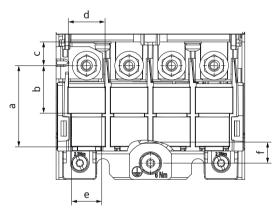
Dimensions of the motor connection block for Motor Modules 45 A and 60 A
